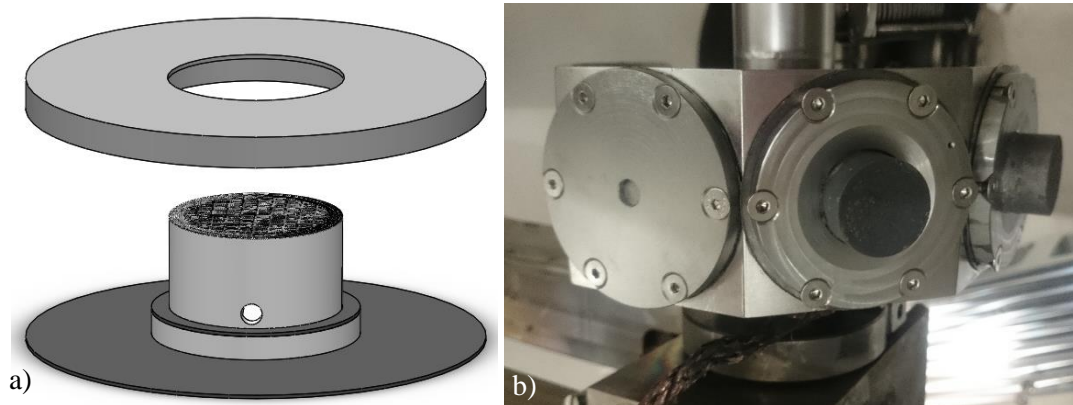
a) Layout for the mounting of the prototypes: grafoil disc, printed target, grafoil ring and clamping ring. B) The dummy (0°) and the conventional ($+45^\circ$) targets during the mounting on the target holder inside the TEAC. Notice that the prototype is very dark, this is because of the oxidized Li on the surface (remember Figure 8-5). On the right of the second image it is possible to see the V-shape target as well ($+90^\circ$).
